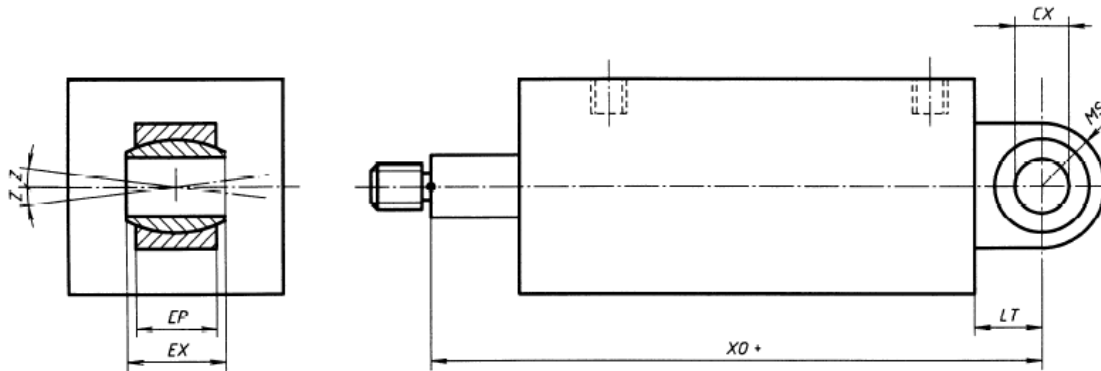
MP5 — Cap mounting, fixed eye with spherical plain bearing
